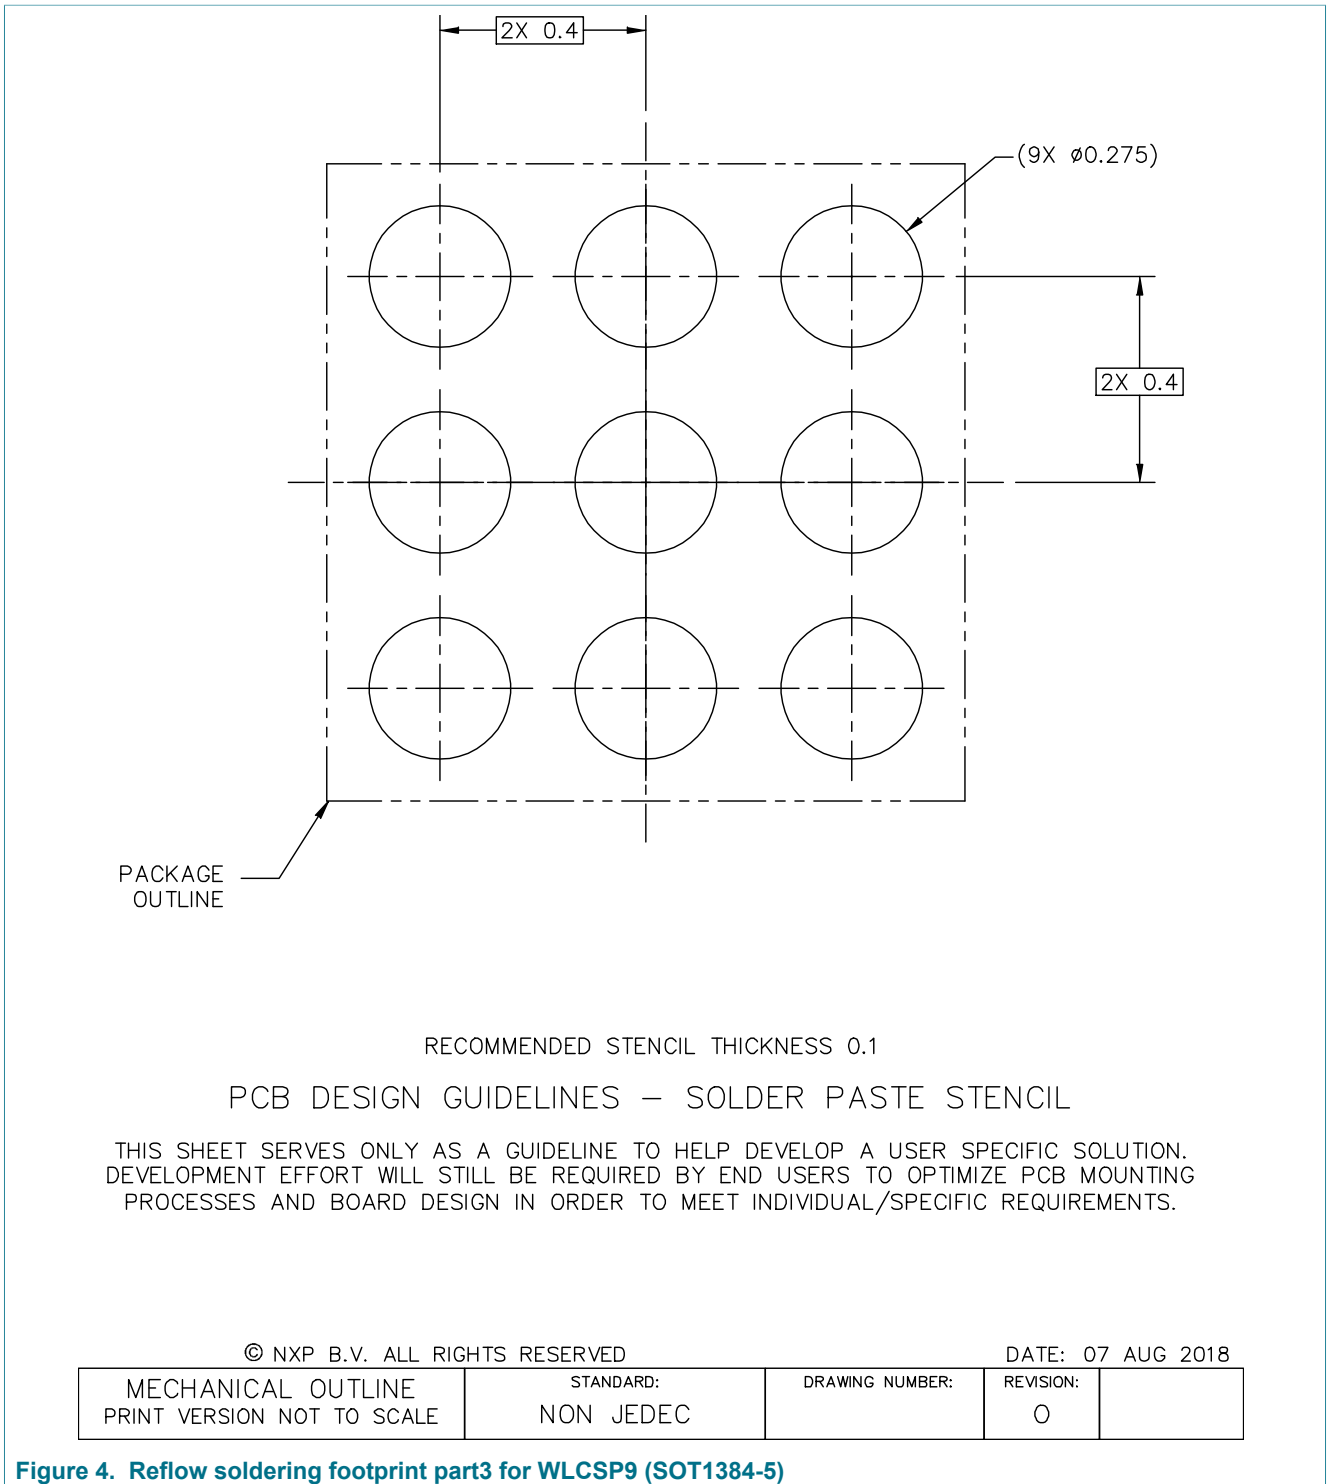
Reflow soldering footprint part3 for WLCSP9 (SOT1384-5)
